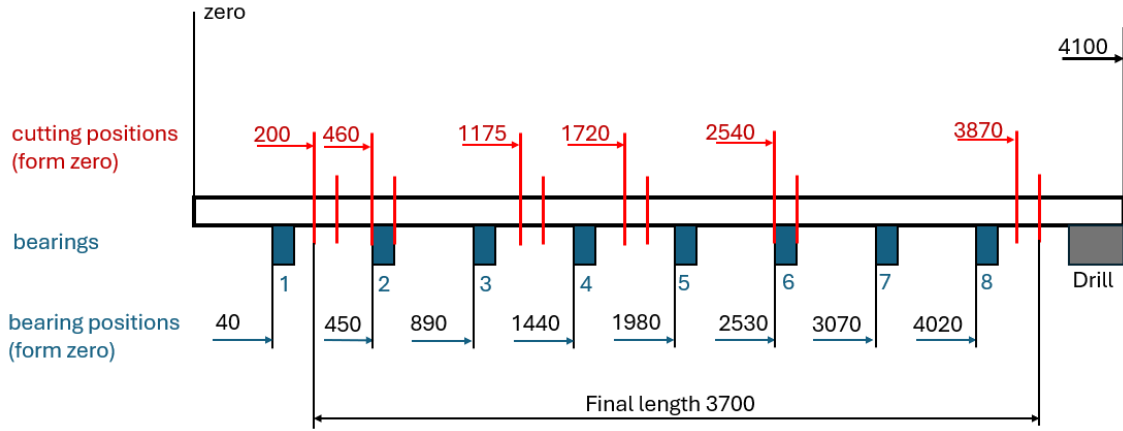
Manufacturing and sampling of the rough tubes inner surface
